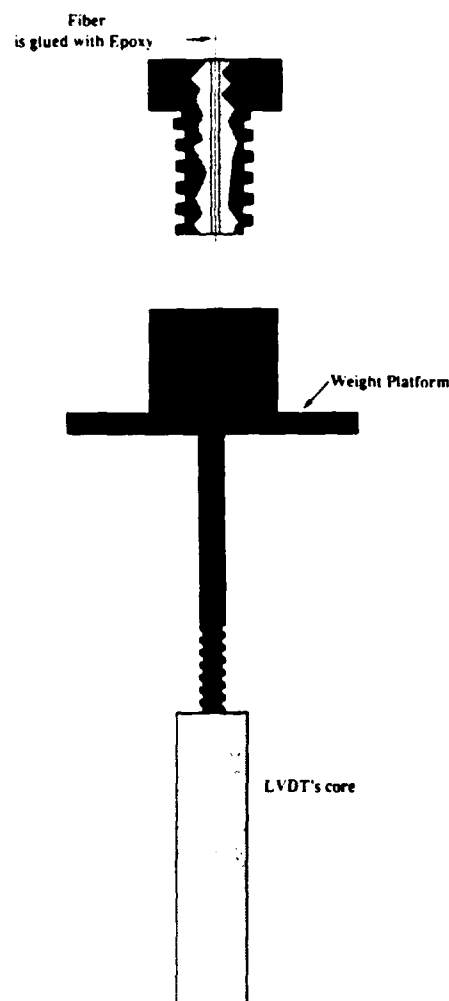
Fibre lower end fixture showing the load platform and LVDT core mounting arrangement. Total weight of the assembly is 10.2 g.
